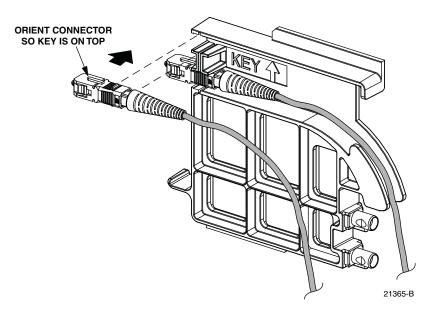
Installing Patch Cord Connector in Dust Cap Assembly
